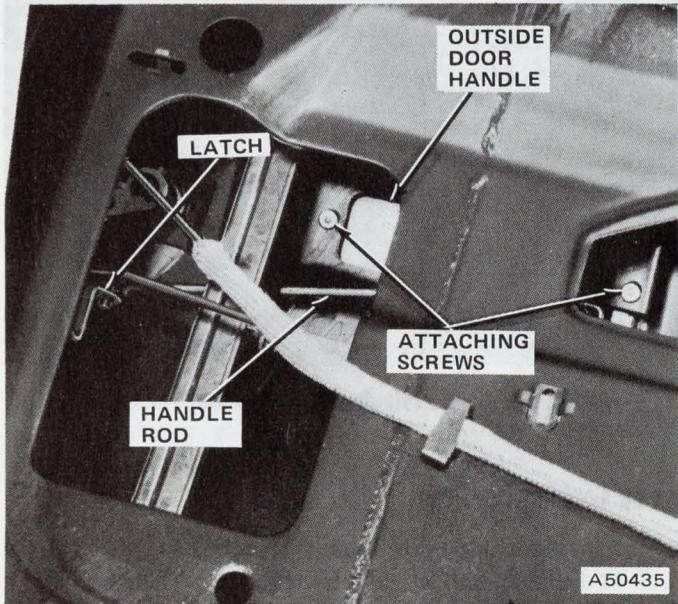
J-14 Outside Door Handle Replacement—Pacer
